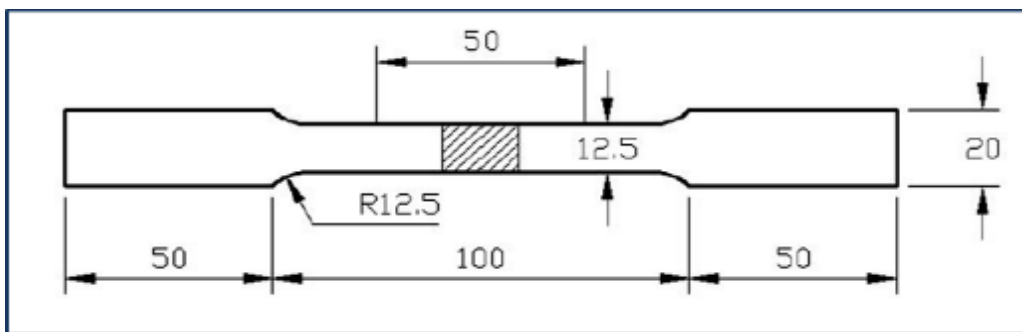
Standard Dimensions of Tensile Test Samples According to the International Standard (ASTM B557M) (All Dimensions in Millimeters) [12]
